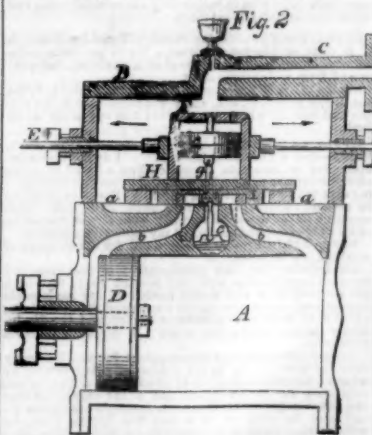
is a vertical section taken through the steam valve chest and cylinder. A is the cylinder, B the steam chest, C the inlet steam pipe, D the piston, E the valve rod, F a small cylinder in the valve chest, which has a small piston, G, in it, having a jointed arm, g, in it, extending down within the exhaust cavity of the valve seat, and rocks on an arbor or shaft therein. The piston, G, is fitted steam tight in its small cylinder, and the pressure of the steam comes upon its top surface. There is a plate or valve driver, to which the small cylinder is attached; it laps around the valve ends leaving a small space between them. I is a chambered slide valve, and a are cavities in the face of the valve seat, and by the valve connect with the ports that lead to the cylinder, A. The valve driver plate is placed between a valve at each side, hooking around their ends with the small space between them, as shown, for lead; it does not lie nor press on the top of the valves.
